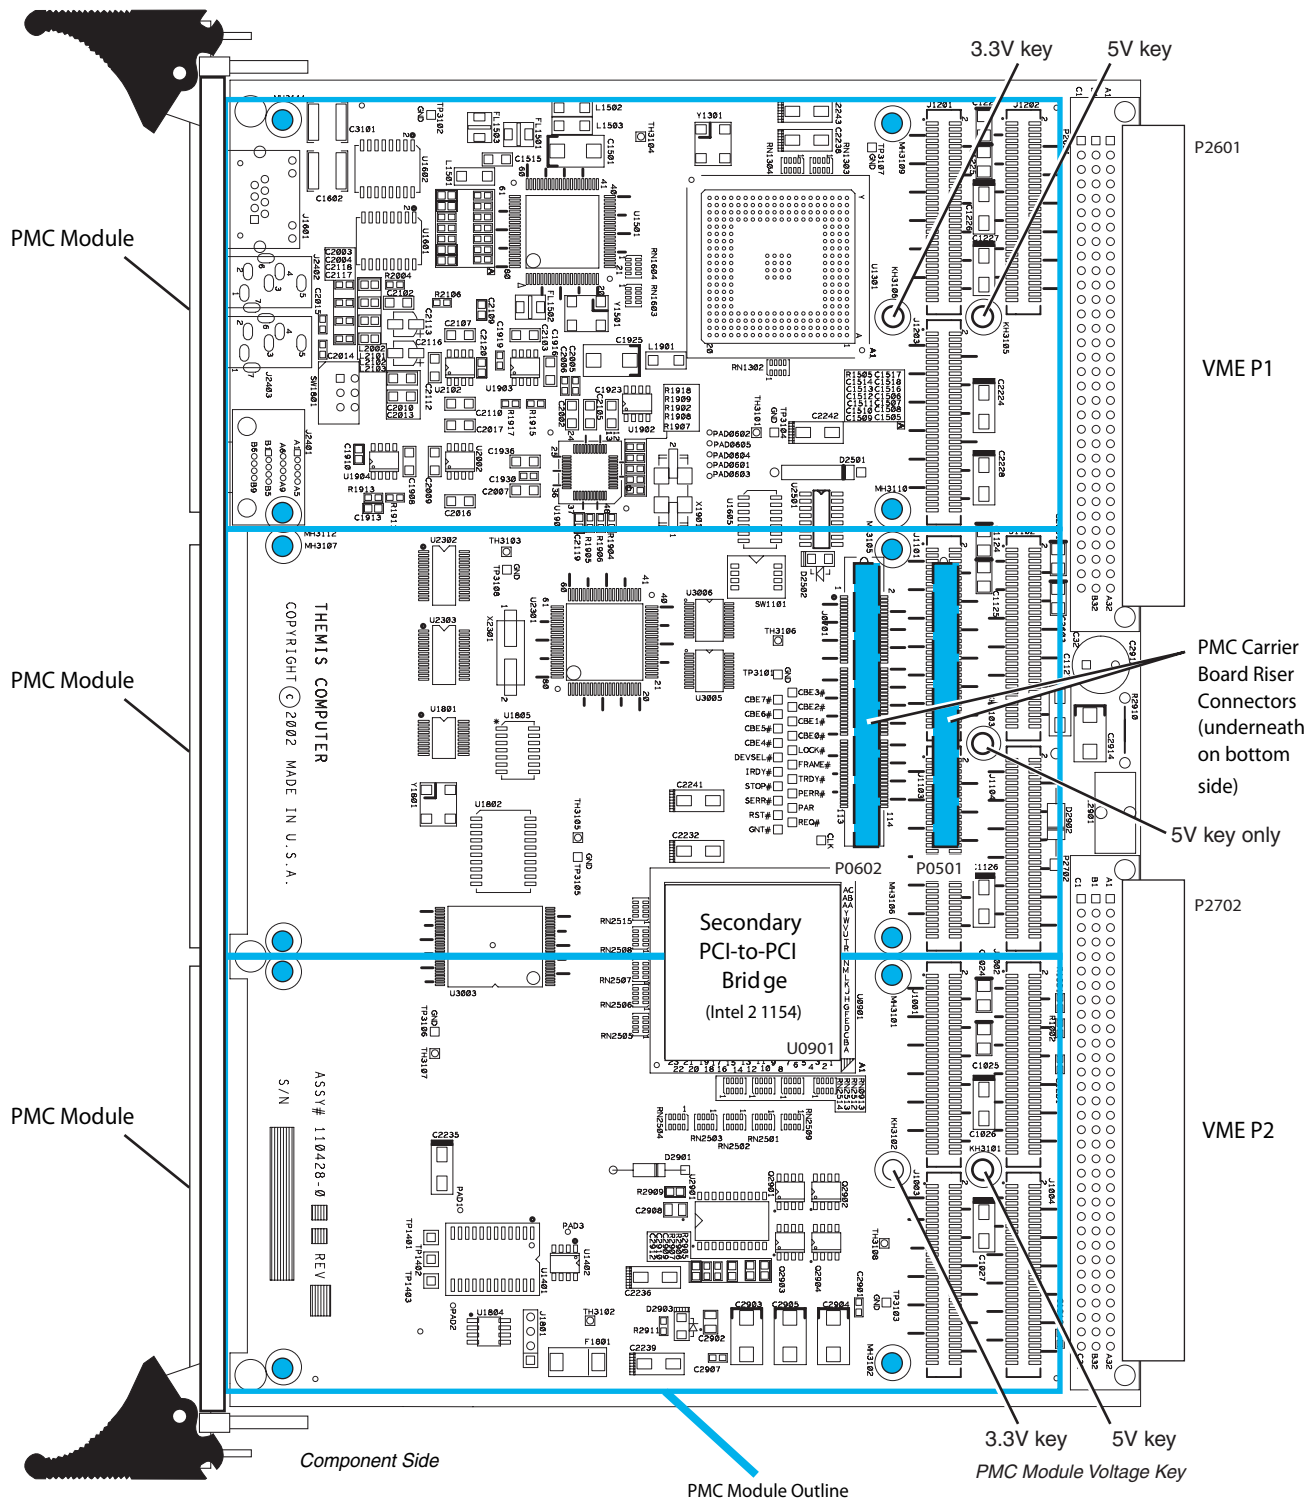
2P3 PMC Carrier Board Component/Connector Diagram
